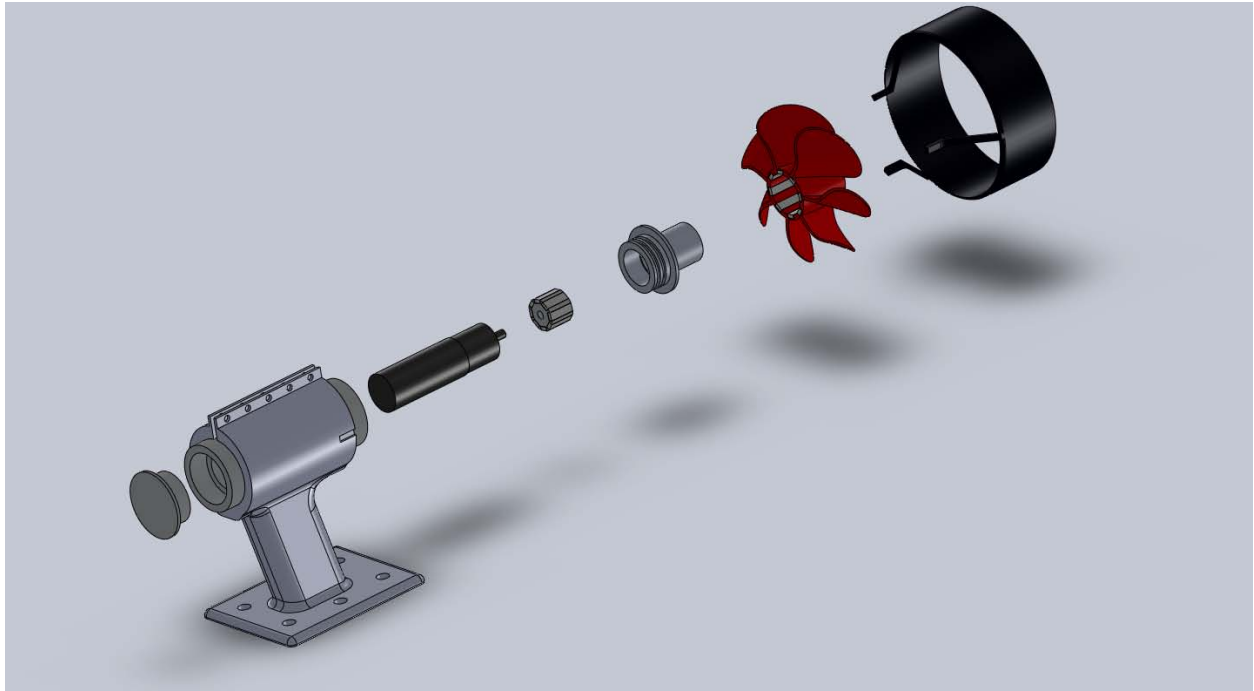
Exploded view of Primary thruster unit in Solidworks.
